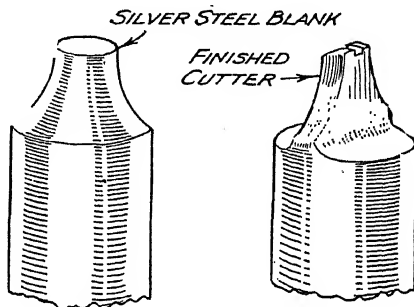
(Left) The blank from which is made the cutter on the right. It will be found useful for awkward jobs.
